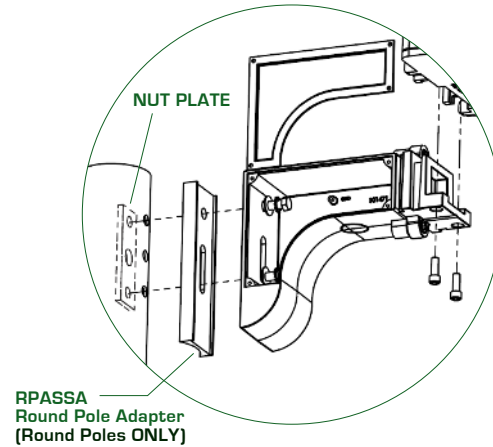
CTLARM - SLIDE FIXTURE ONTO MOUNT ADAPTER
